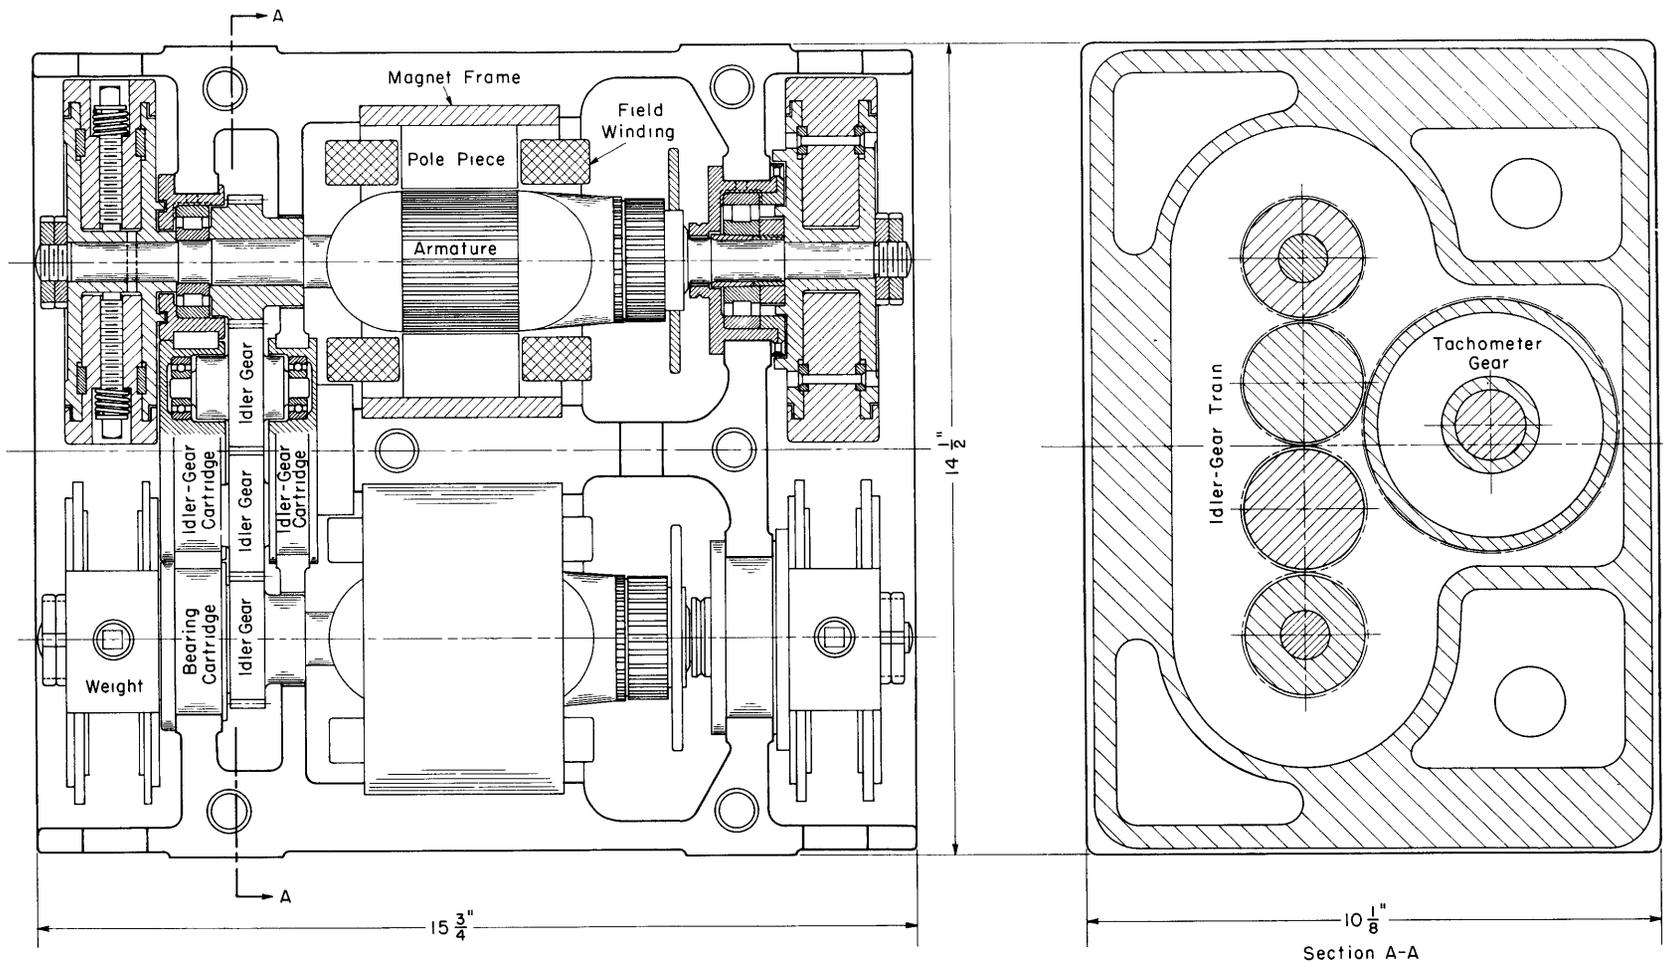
A Plan View and a Sectional Elevation of the Losenhausen 440-Pound Vibration Generator
